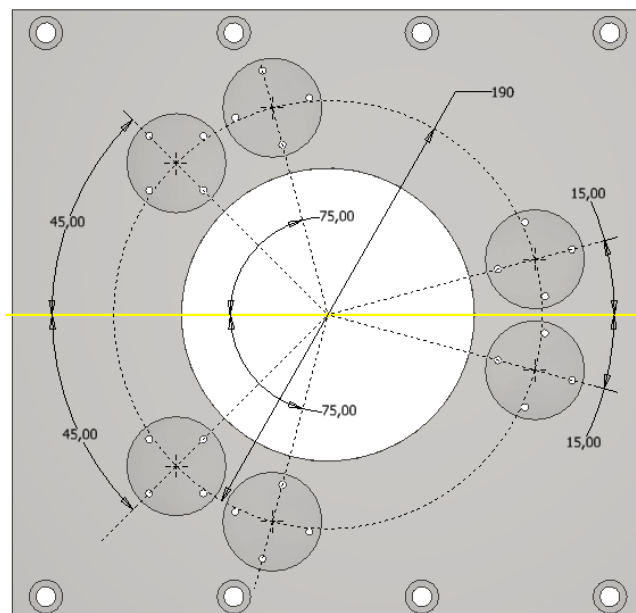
frontal view of the base plate with the six spherical joints holes geometrically dimensioned with respect to the centre of the plate.
